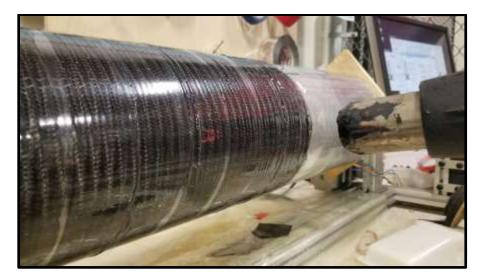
Removal of excess epoxy using a combination of heat shrink tape and heat supplied using a heat gun.
